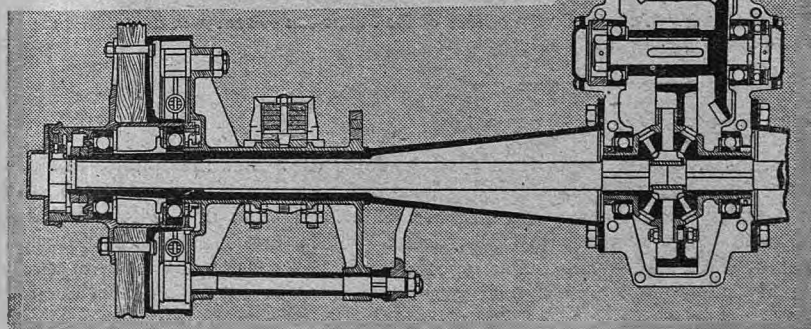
Part section of the 12 h.p. Lion Peugeot back axle showing the bevel reduction gear which drives a counter-shaft carrying a straight tooth pinion meshing with a crown pinion on the differential gear box.
